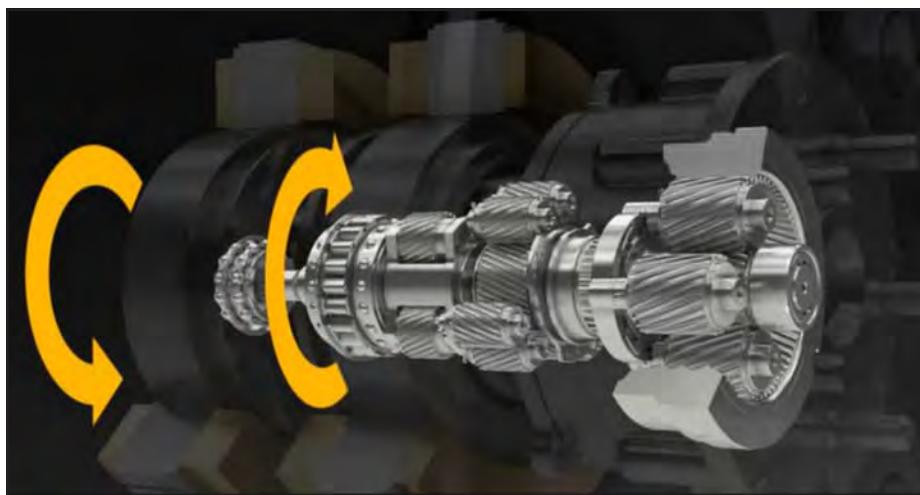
Double-wheel hub motor with transmission (Ref. 11).
